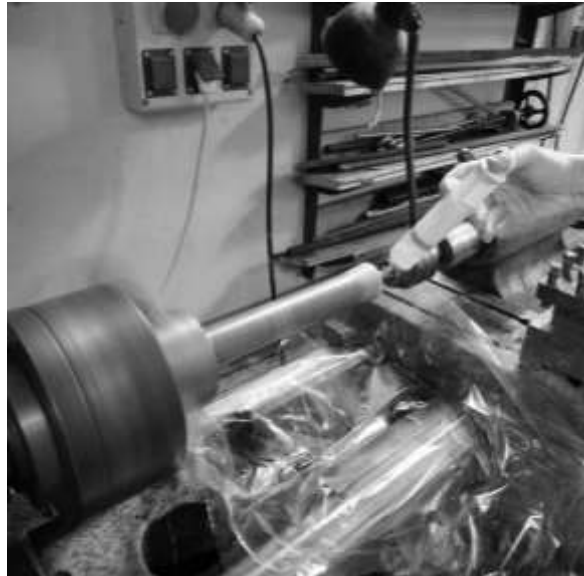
Centrifugal casting of the inner layer of the cylinder
